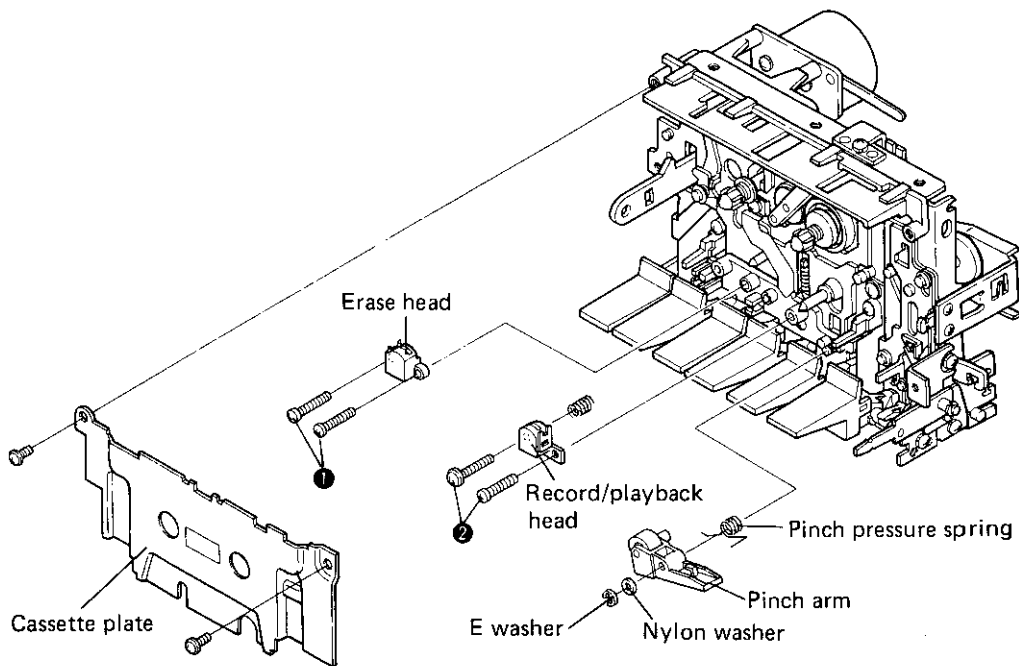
Removal of Pinch Roller, Erase Head and Record/Playback Head
